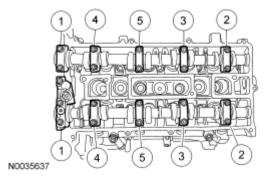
Identifying Loosening Sequence Of Camshaft Bearing Cap Bolts Courtesy of FORD MOTOR CO.
